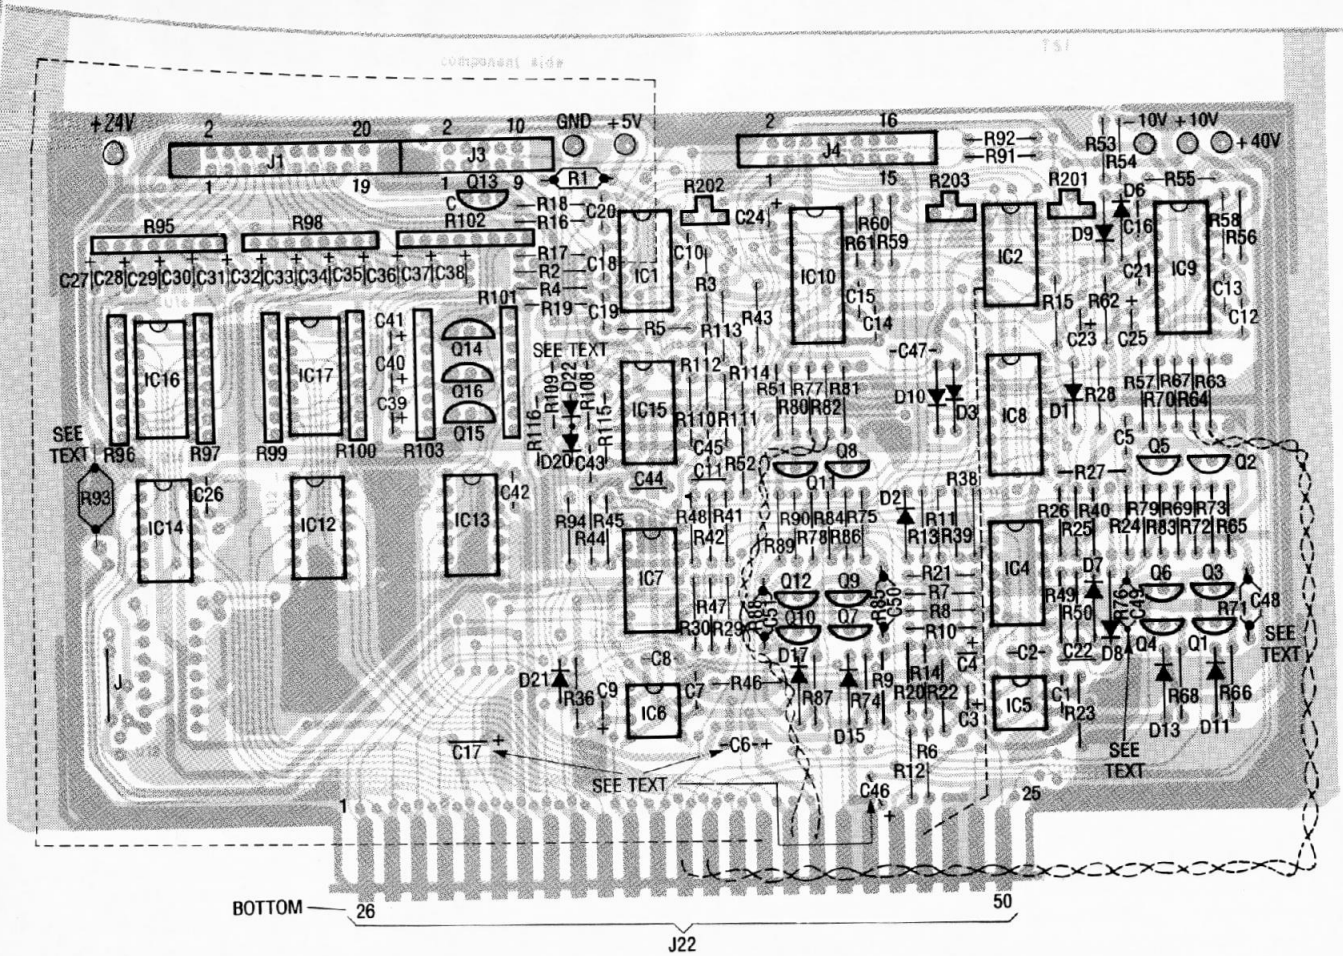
PARTS-PLACEMENT DIAGRAM for the motor-controller board.
